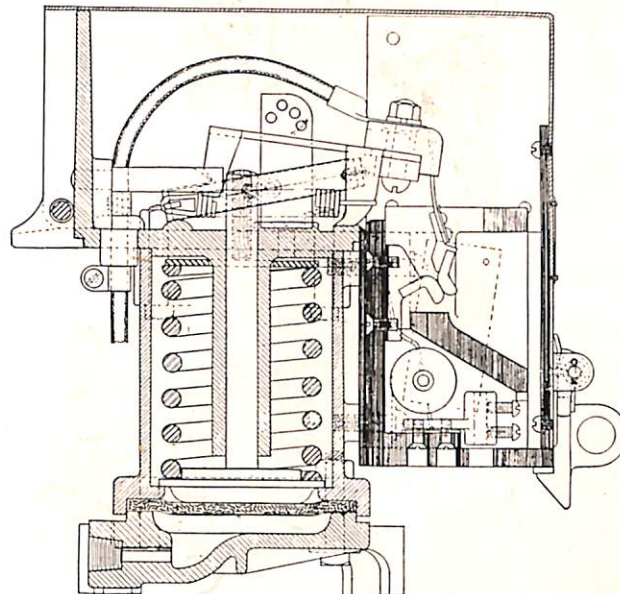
SECTION OF AIR COMPRESSOR GOVERNOR, TYPE ML
